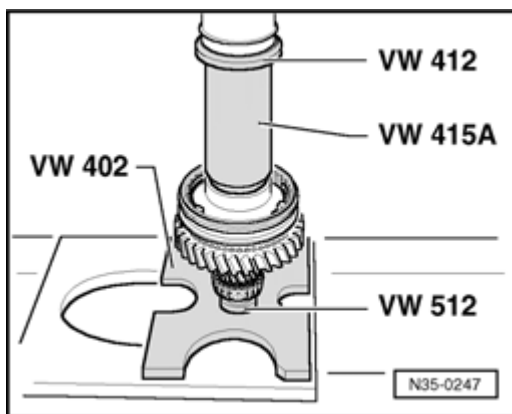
Pressing on 1st and 2nd gear locking collar/synchro-hub
